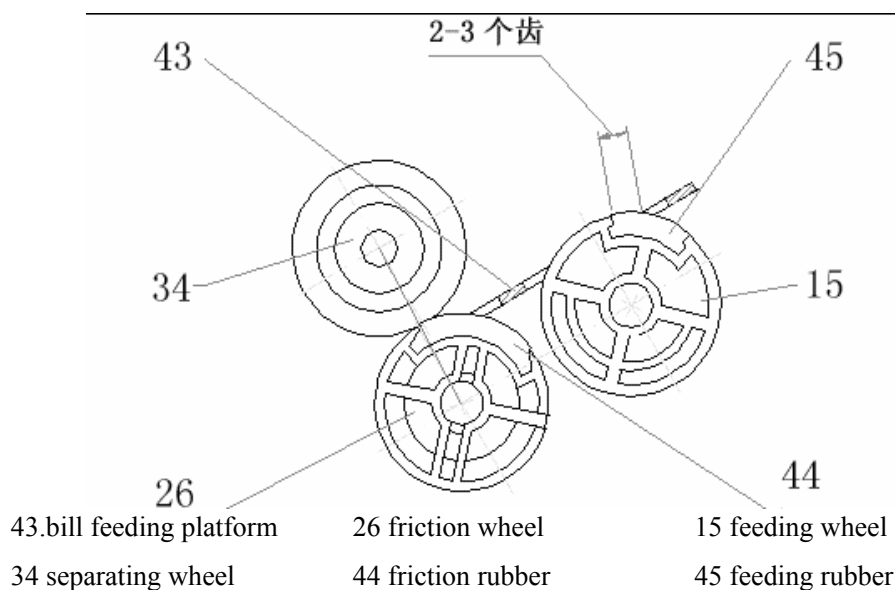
Position Drawing of 26, the Friction Wheel and 15, the Feeding Wheel
